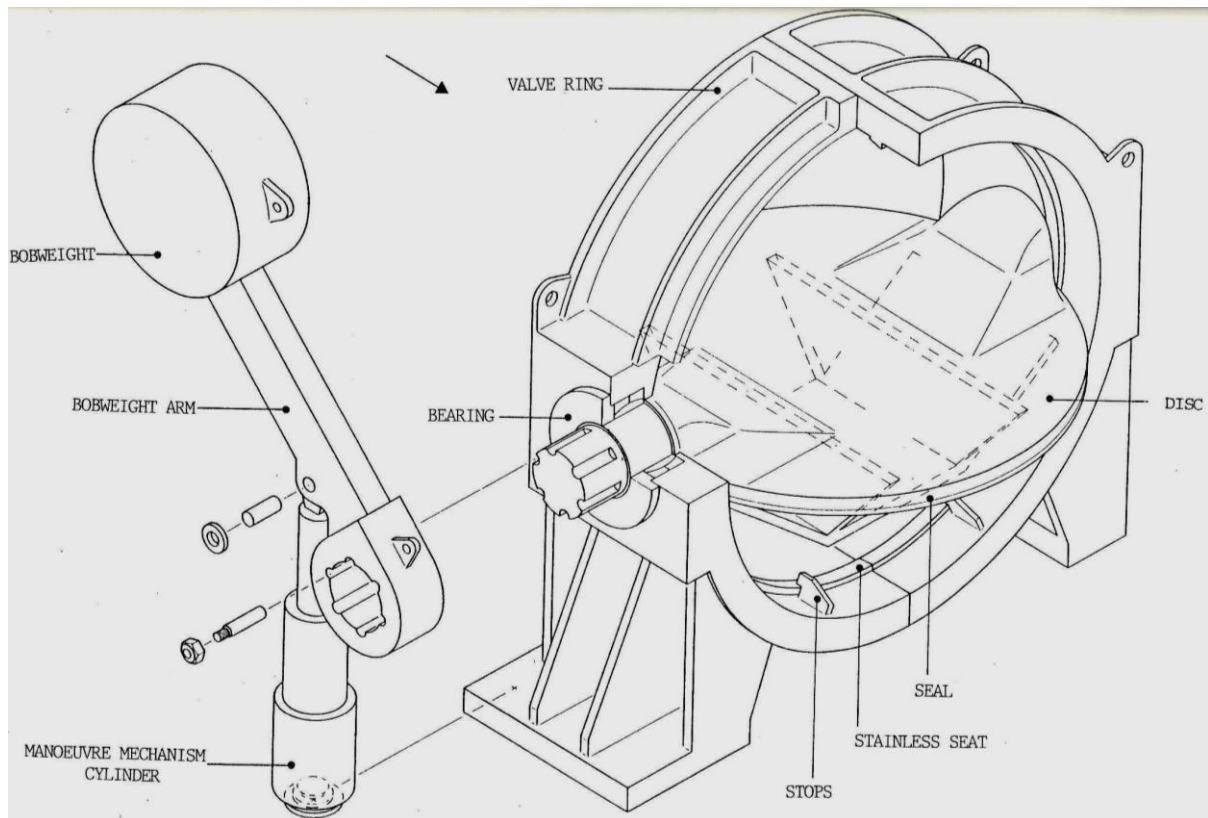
Split view of a fabricated lattice blade butterfly valve.
